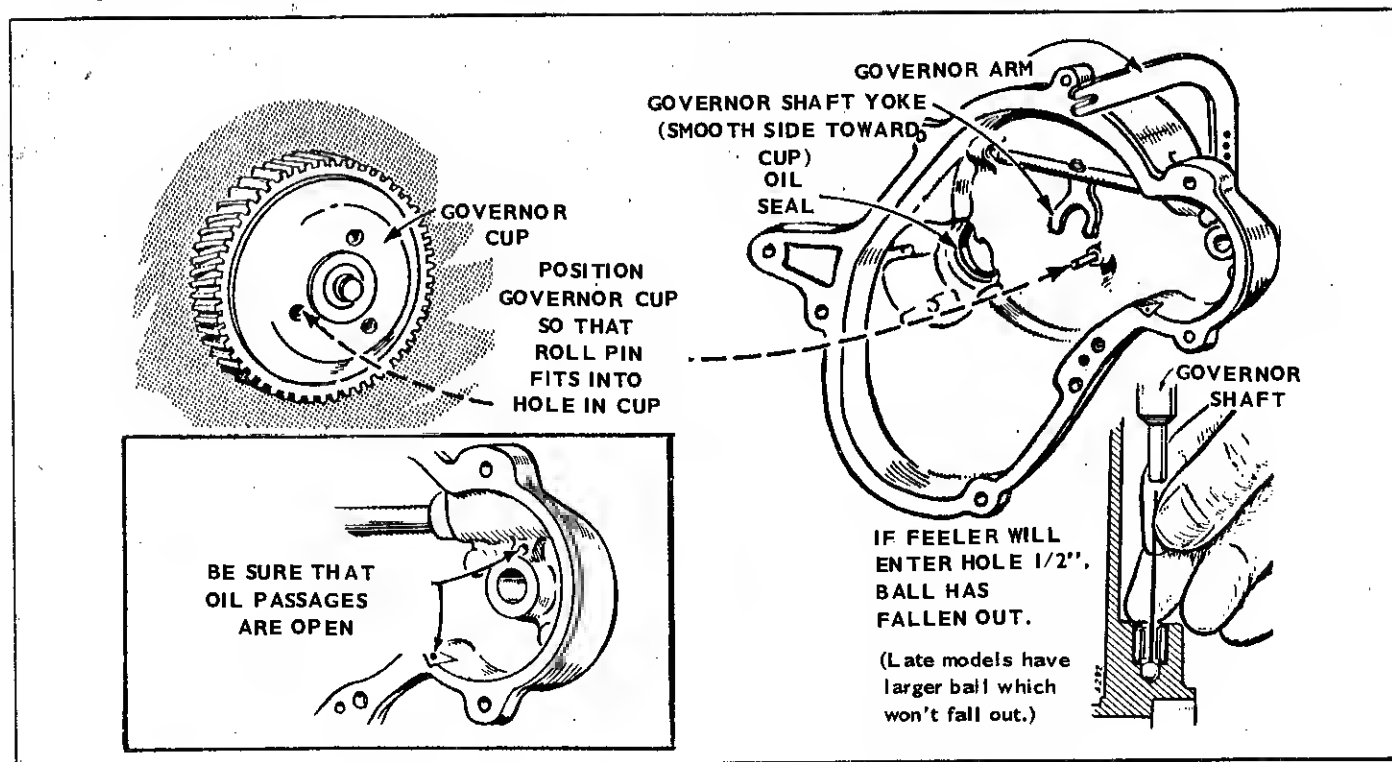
GEAR COVER AND GOVERNOR SHAFT
